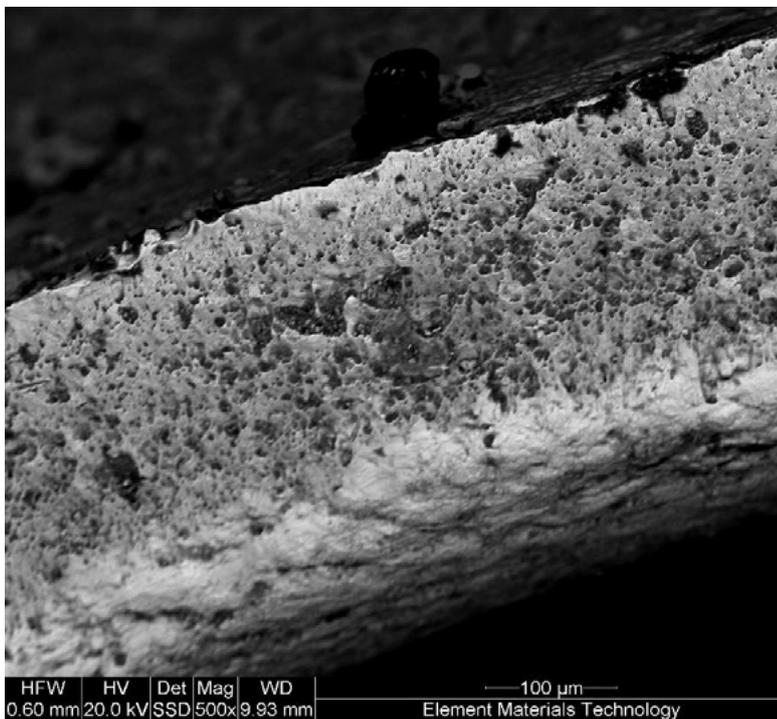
Typical fracture surface in bellows plate: dimple morphology and slightly corroded fracture surface.
